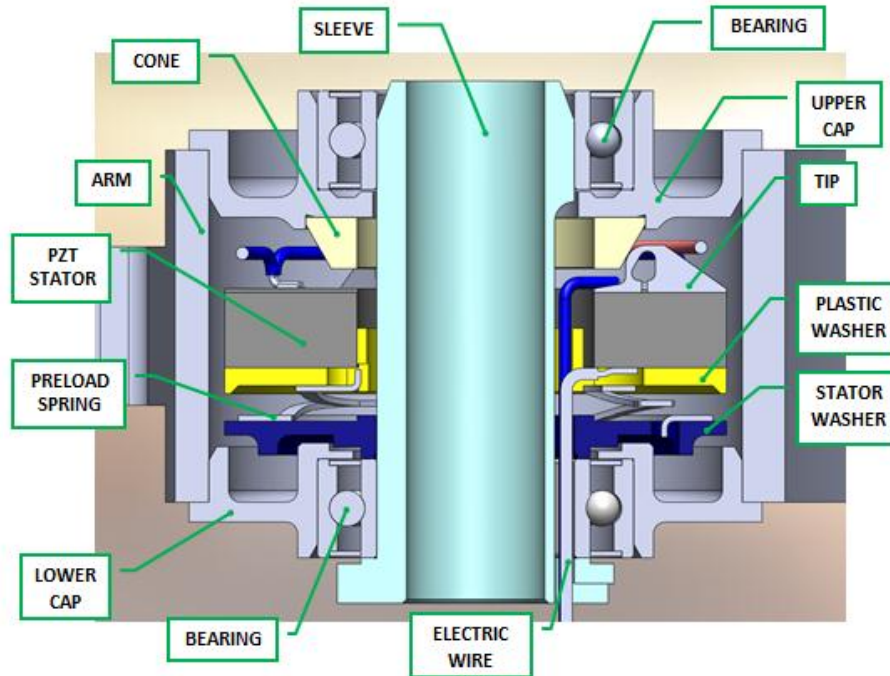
Cross sectional view of a sample prototype of a TRUM HDD Actuator
